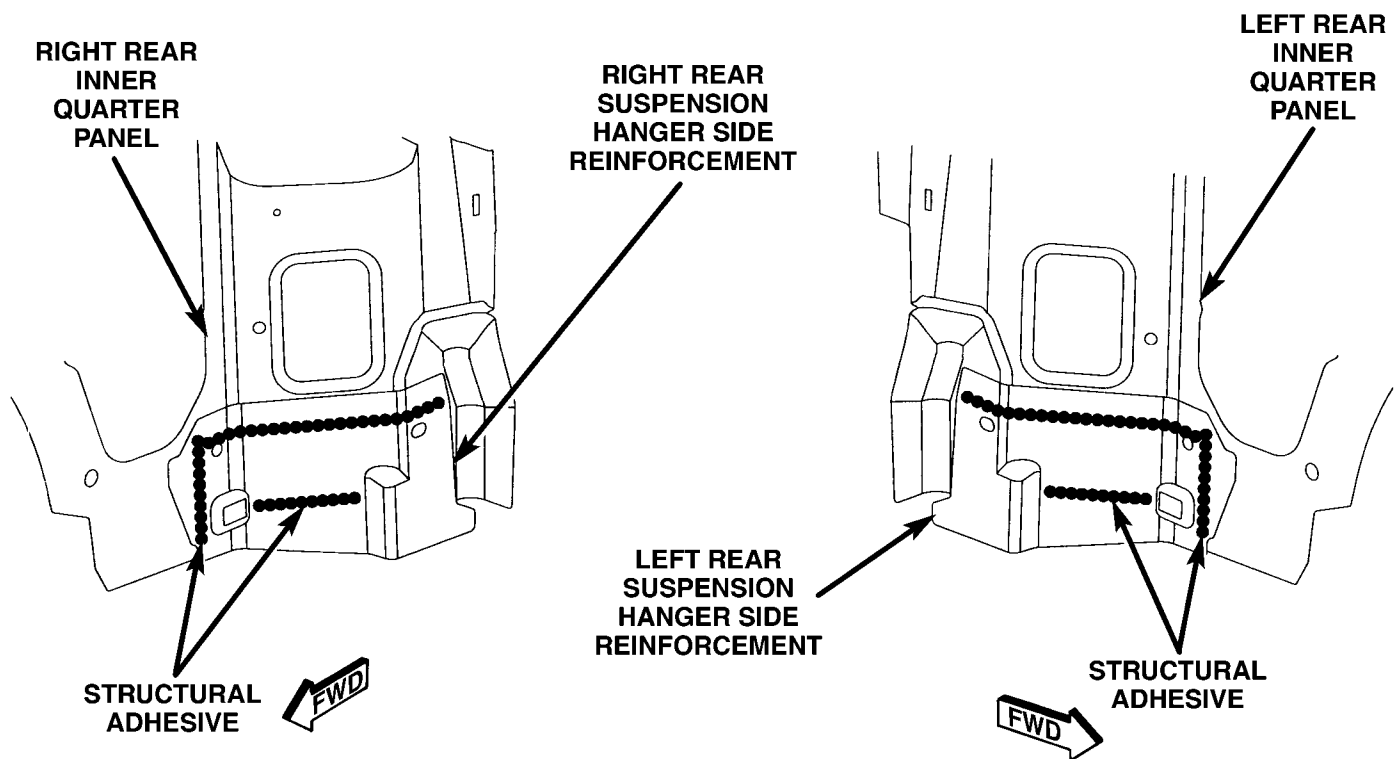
SUSPENSION HANGER REINFORCEMENTS - LONG WHEEL BASE ONLY
